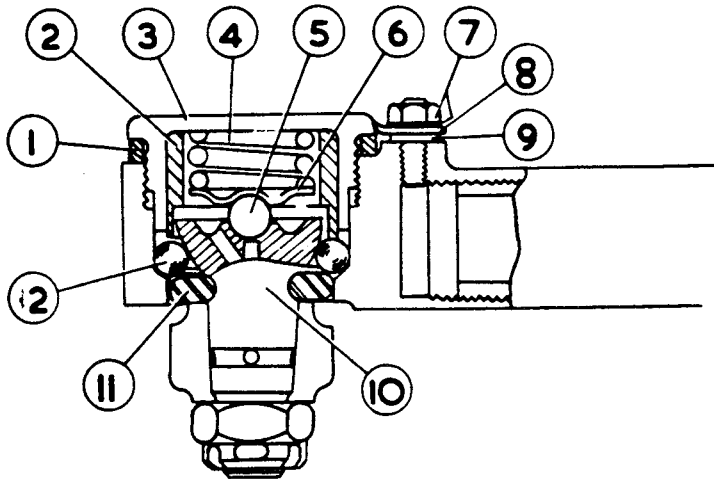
SECTION-SOCKET-SIDE STEERING TUBE FRONT END (PRIOR TO MODIFICATION.)
